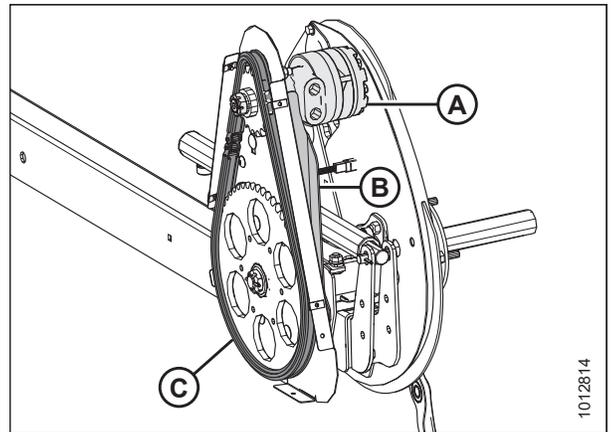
Single-Reel Drive Shown – Double Reel Similar
